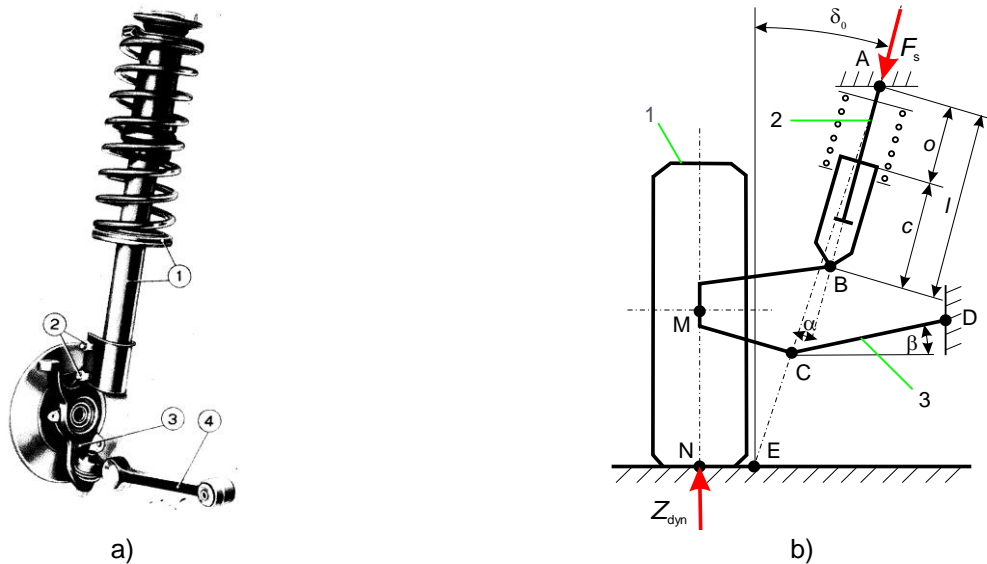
MacPherson strut suspension system: a) actual design (1 - strut, 2 - connection of the strut with wheel hub carrier, 3 - wheel hub carrier, 4 - lower arm), b) geometrical model (1 - wheel, 2 - strut, 3 - lower arm)
